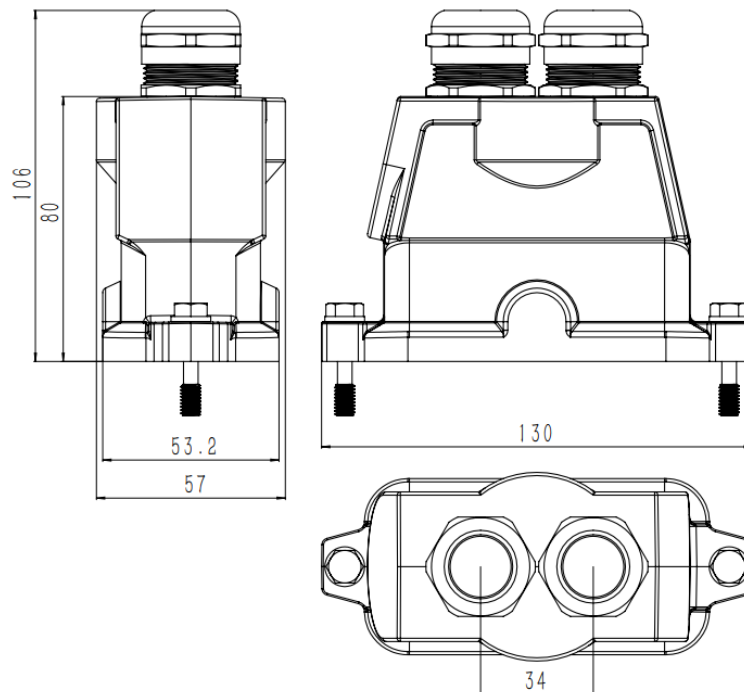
AIR6L-A manipulator end heavy load dimension drawing
